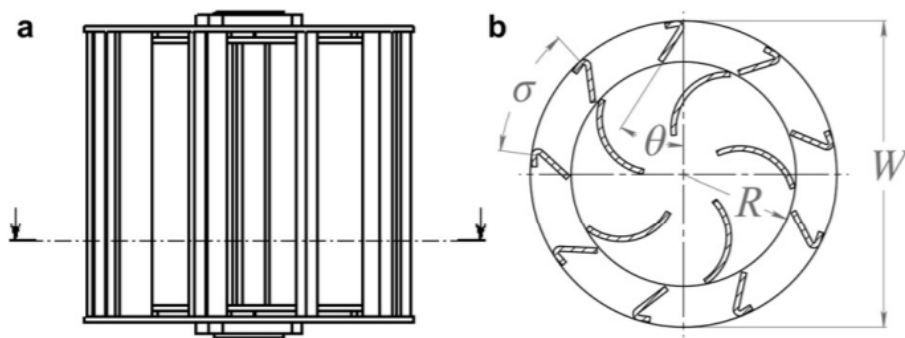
Front view and top view of physical model of Zephyr turbine [88].
